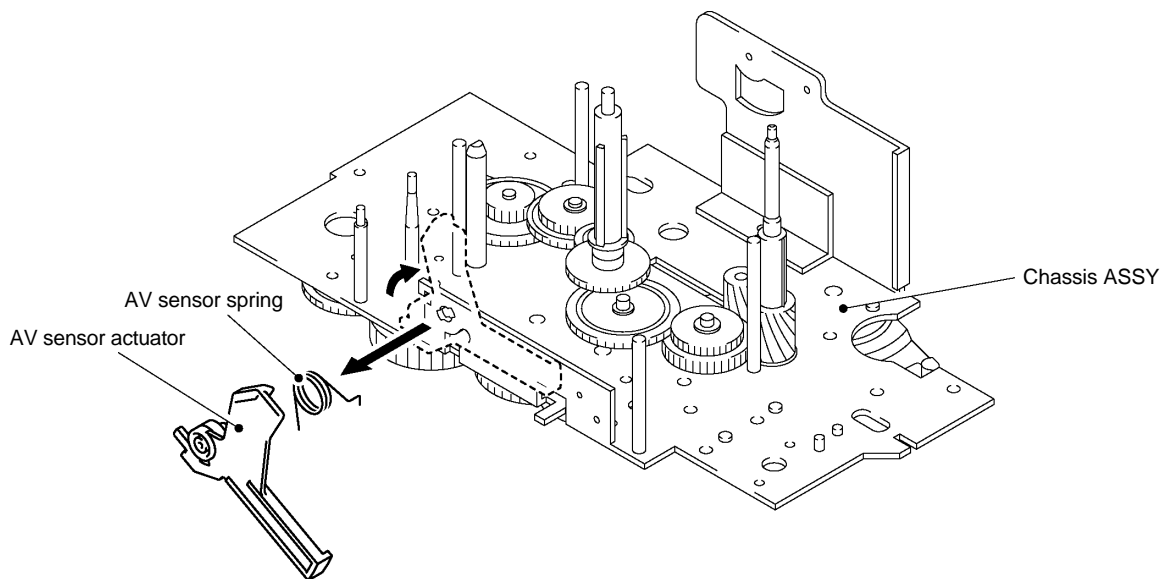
Removing the AV Sensor Actuator/AV Cassette Sensor ASSY (2)
